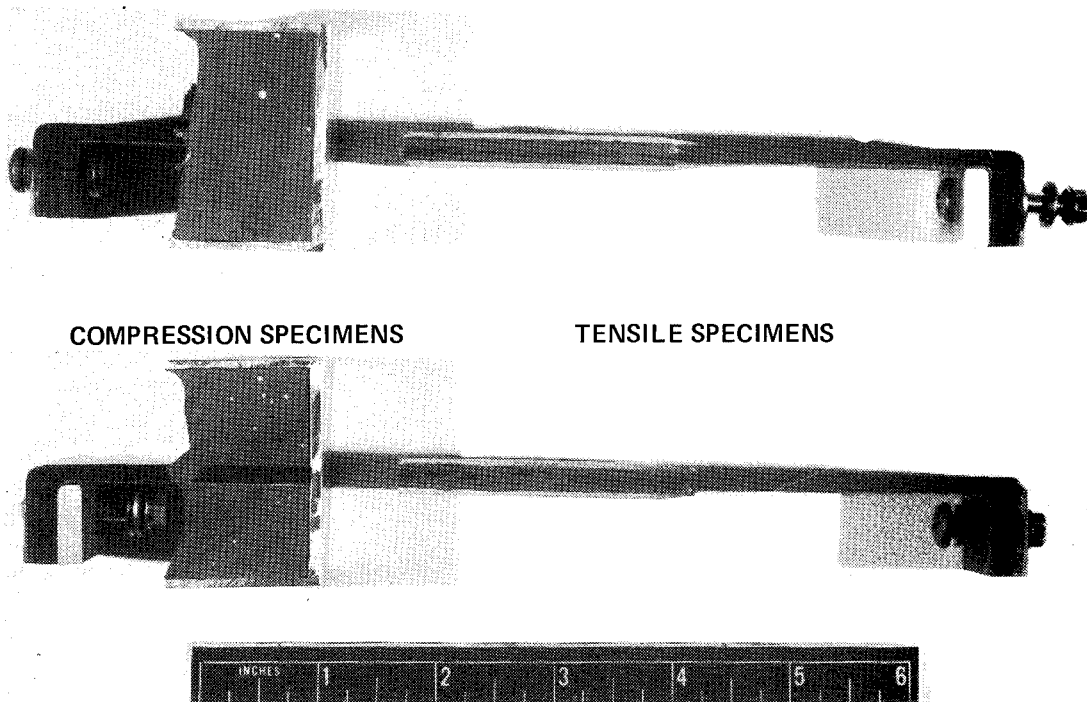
Tensile and compressive joint specimens (two each) after testing.
